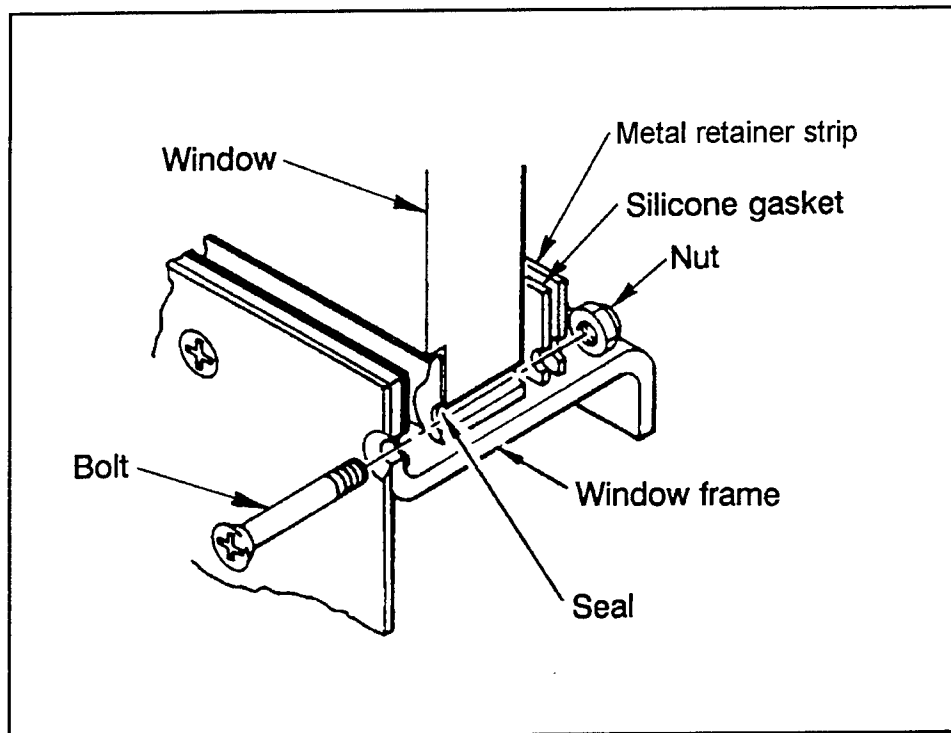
C/KC-135 #4 W/WS Pressure Integrity Mounting Frame
